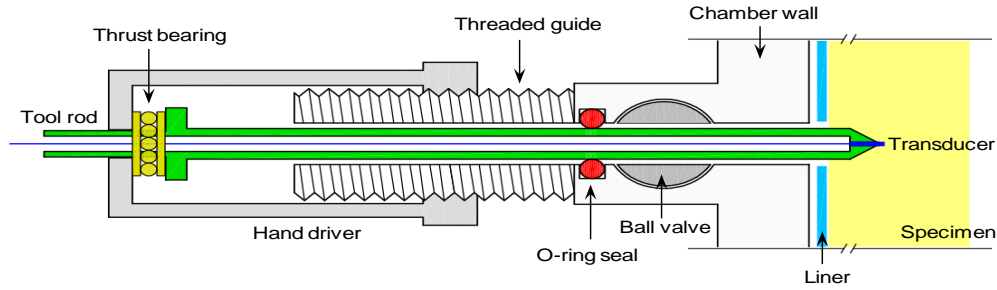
Tool Control. The displacement of sensors, subsampling tools and drills are controlled under pressure using a screw-based positioning system where the driver advances along the threaded guide while pushing the tool rod (shown in green). Transducers at the tip of the rod are wired through the central hole in the tool rod.
